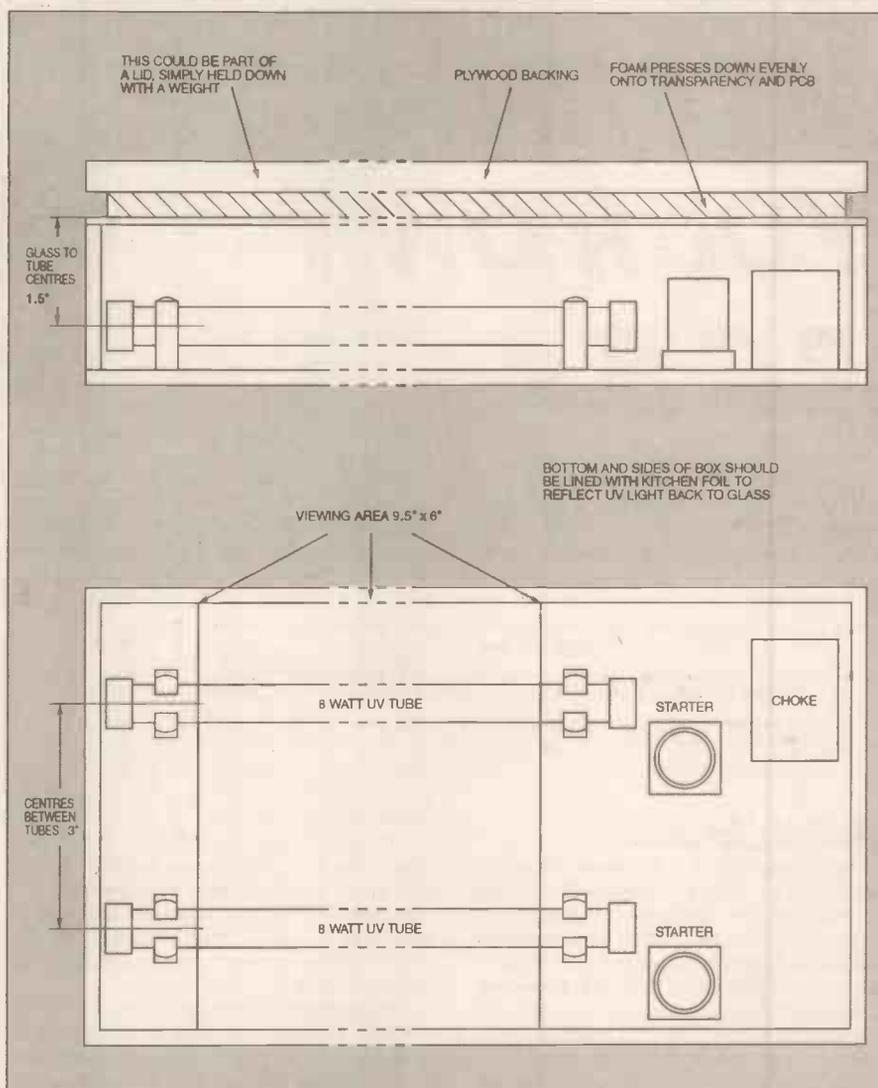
Dimensions and layout suggestion for a two-tube UV Lightbox.
